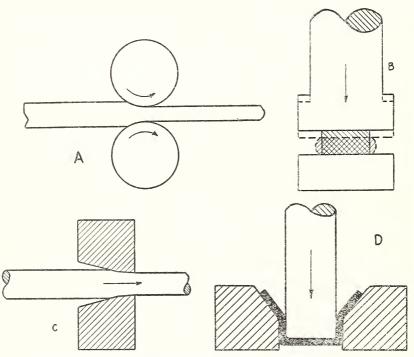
FIGURE S.—*Methods of mechanical working of steel*. A, rolling; B, forging; C, drawing rod or wire; and D, deep-drawing.
